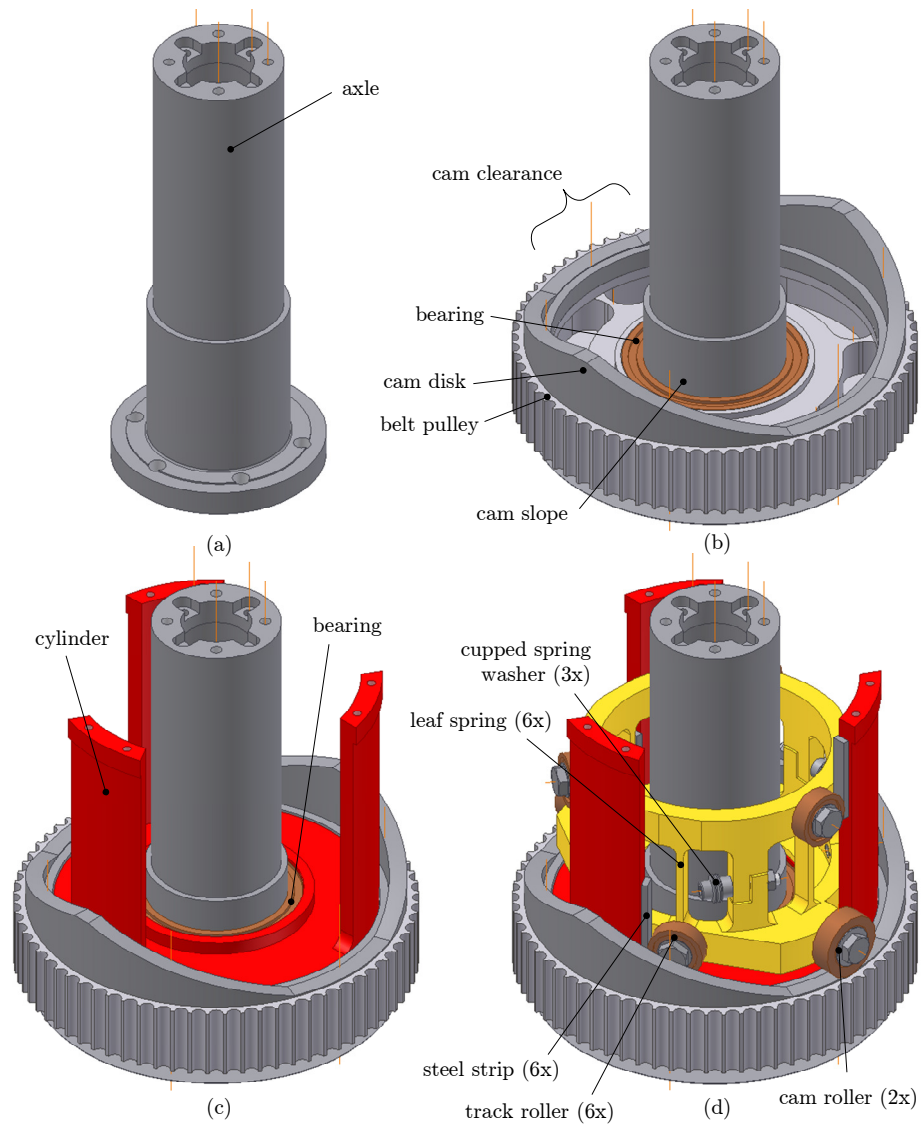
(a) The axle functions as the fixed world. It is a cylinder where the drive-aid motor is mounted into. (b) The belt pulley and cam disk are fixed to the axle via an angular contact bearing and a deep groove ball bearing such that it can only rotate around the axle. (c) The cylinder is also fixed to the axle via a deep groove ball bearing. (d) A linear guidance which is statically determined and backlash free is designed which defines the trajectory of the cam rollers when engaging the cam slope while passing on large reaction forces.
